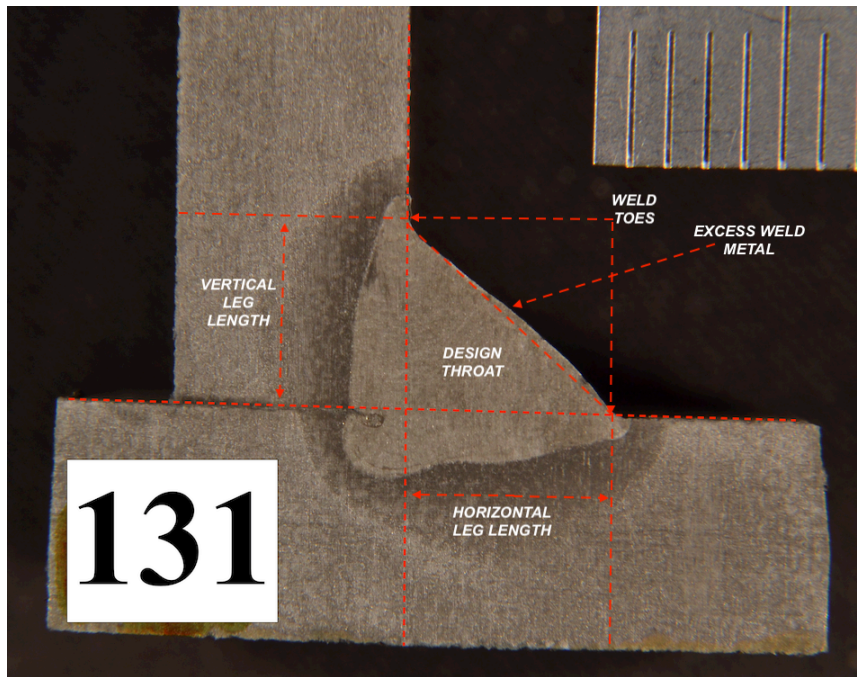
Fillet Weld - Throat thickness ( $a$ ) and Leg Length ( $z$ ) – Design Throat (Mitre Fillet). This macro etched fillet weld was one of the sample joints welded and tested during the experimental schedule as part of this work.
